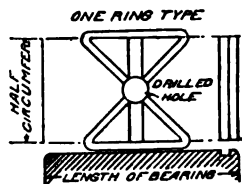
SEC. 7a.—Single ring oiled bearing. Oil groove layout. (Courtesy Power Plant Engineering.)
